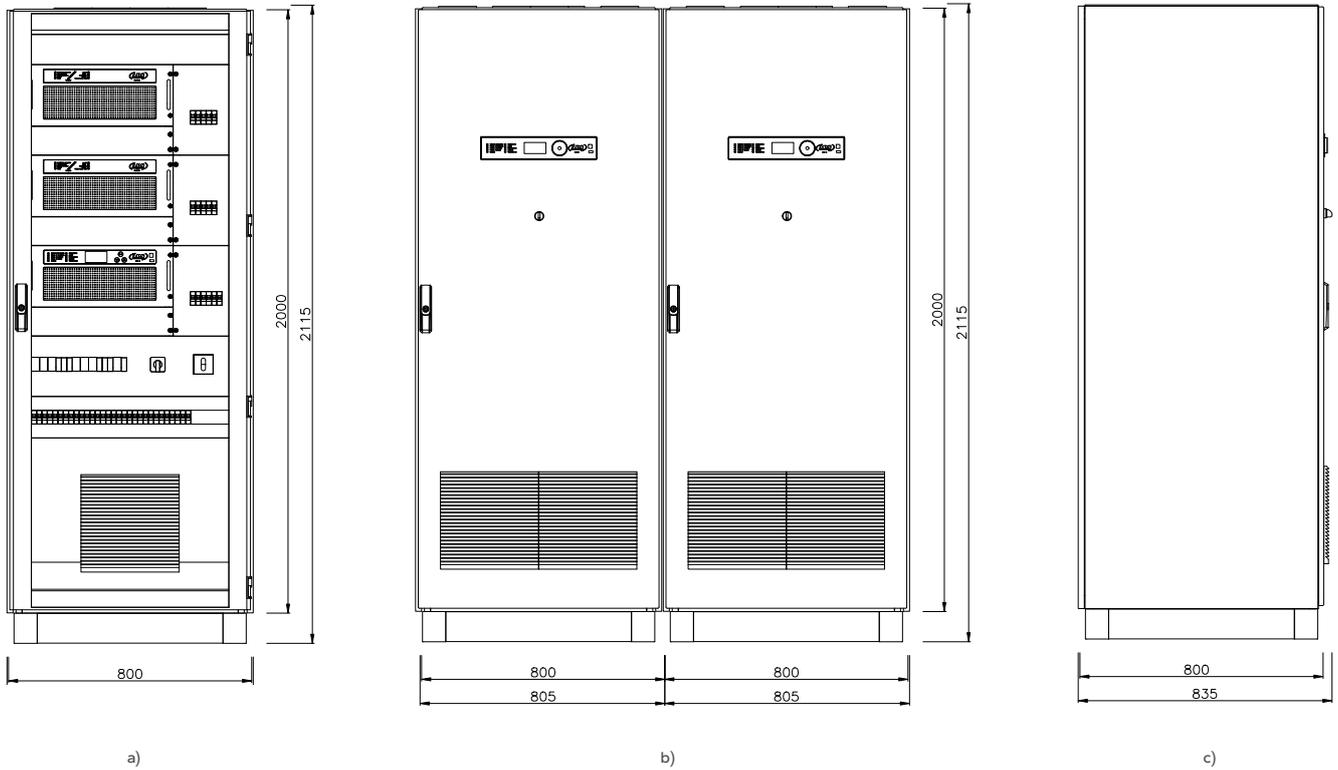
Views with dimensions of the BF1pz / BF1p type inverter cabinet:
